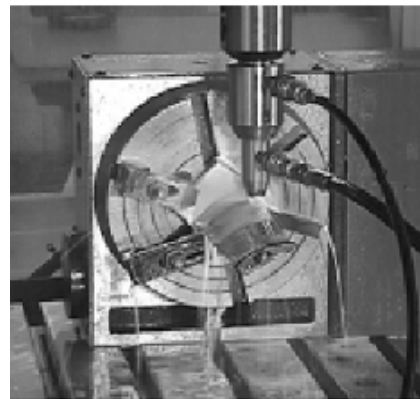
LPB tool being used in four-axis mode while performing LPB on a compressor blade in a 20 HP vertical CNC mill.
